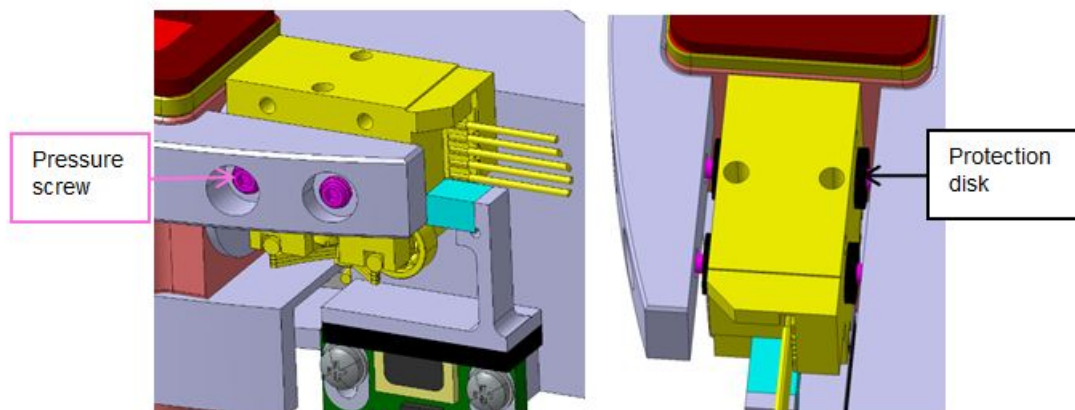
Motor Adjustment and Attachment [Calabrese, 2017].
